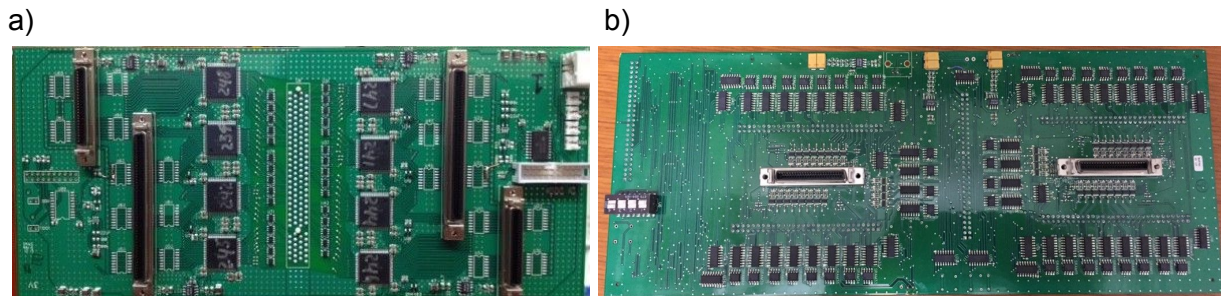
Figure XXX - a) Oxy/BNL 120 channel front-end board. b) Oxy 40 channel digital acquisition board.
